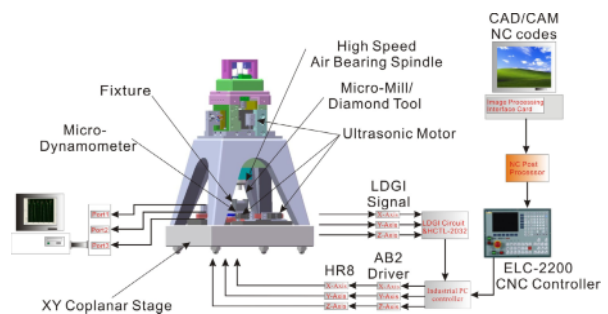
Schematic of the meso-scale 3-axis milling machine tool and control system
